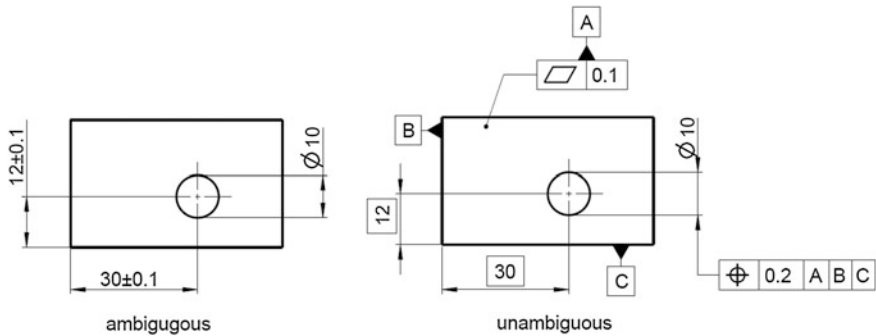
Ambiguous distance tolerancing and unambiguous position tolerancing
